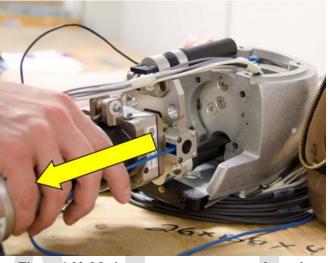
Motion necessary to separate the neck assembly from the skull assembly
